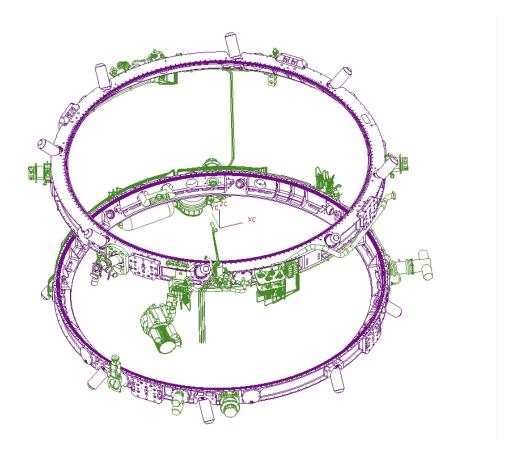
Vacuum Case Upper and Lower Support Rings (With Misc. Cryo Magnet H/W Attached)
